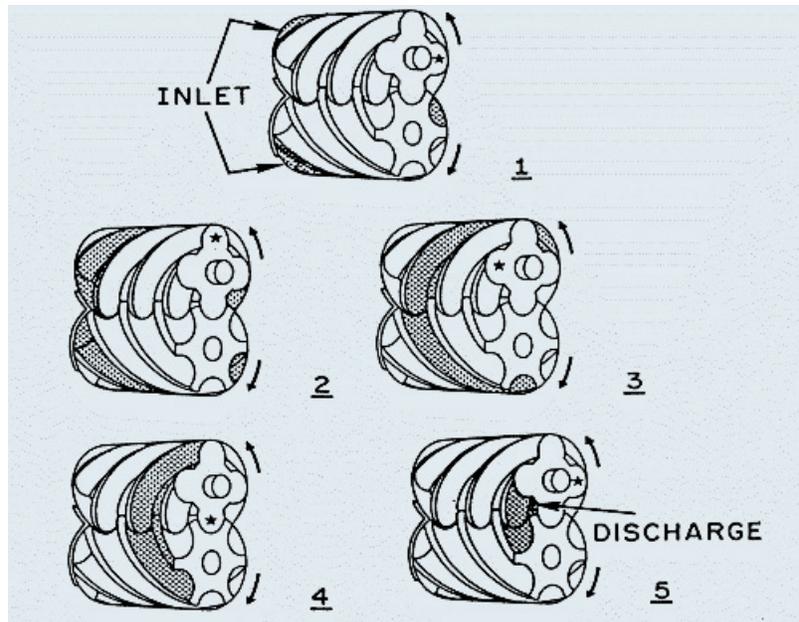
Principles of compression in double helical screw compressors. (Source: Maschinenfabrik Aerzen, Aerzen, Germany; also, Aerzen USA, Coatesville, Pennsylvania.)
